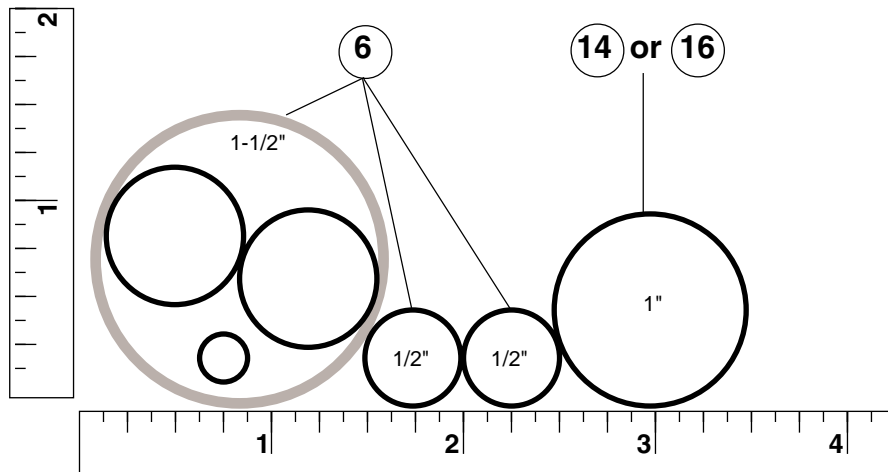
Cables / Hoses in Machine Cable/Hose Carrier - No Options
